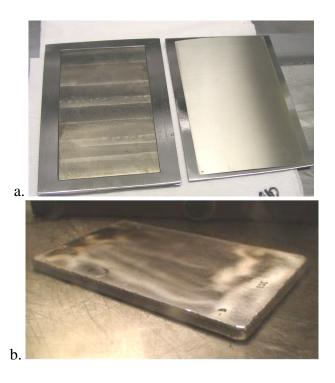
a) Full size U10Mo coupon hot rolling assembly lay-up, b) welding hot rolling assembly.
